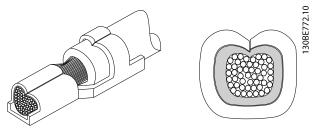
F-crimp - Insulation Securely Held, Crimp Barrel Closed
